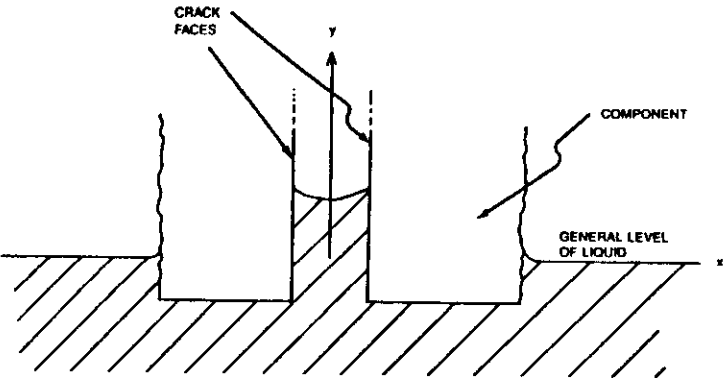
Component containing crack immersed in liquid penetrant.
